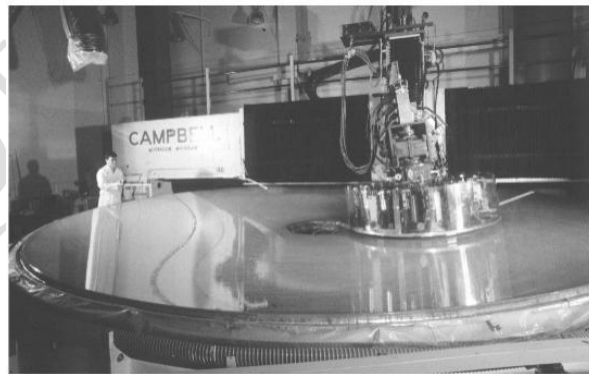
Schematic of stressed-lap processing integrated with a large-scale CNC machine tool.⁵⁸
